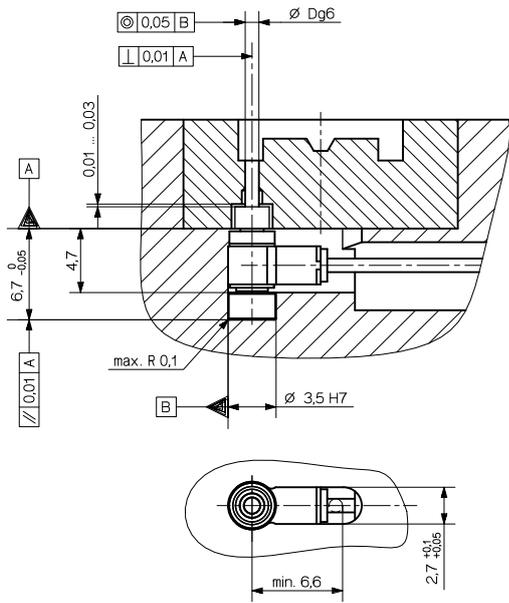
Mounting in blind hole with measuring pin and hardened thrust washer $\varnothing 3,5$ mm Type 9406
